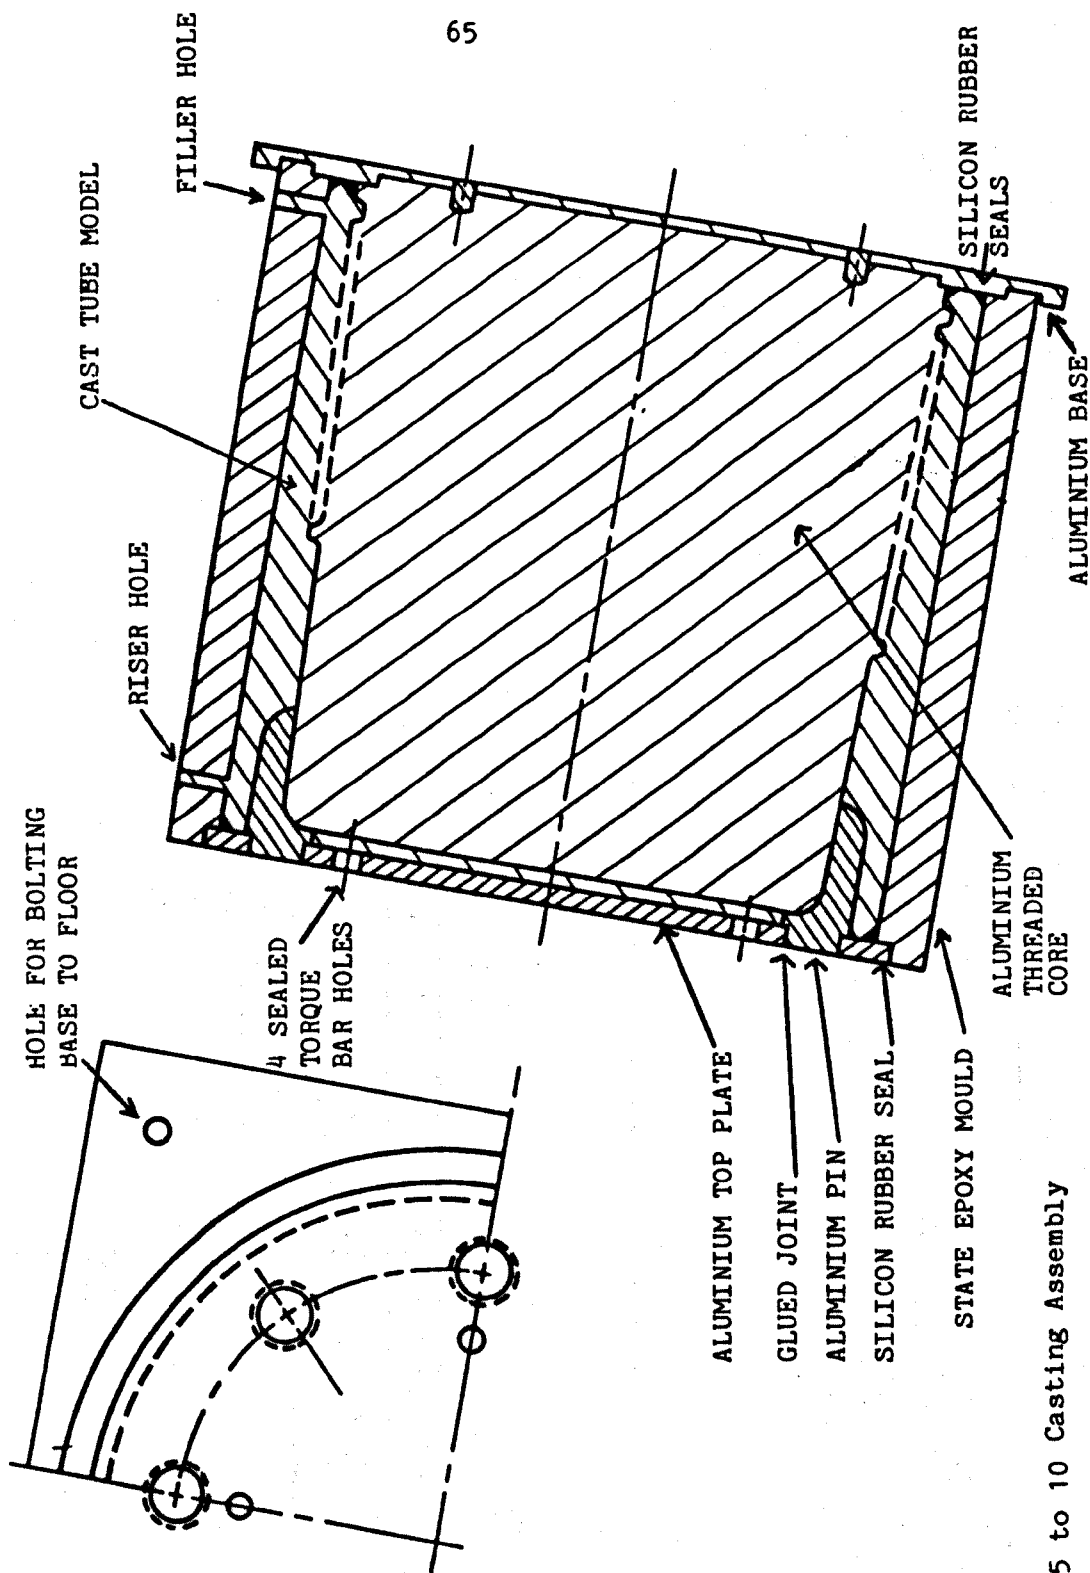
Tube Models 5 to 10 Casting Assembly
